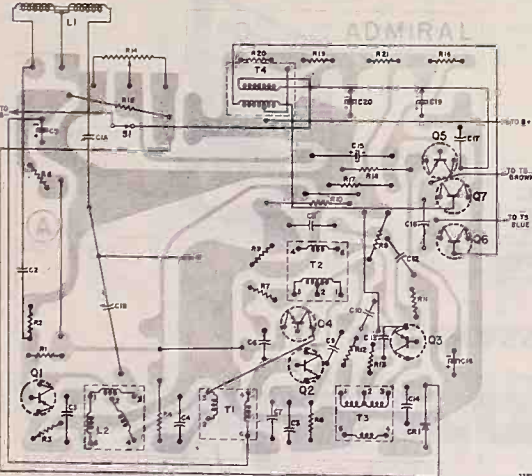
View of Printed Wiring Board. NOTE: Gray area represents printed wiring, black symbols and lines represent components, wiring and connections on opposite side.
